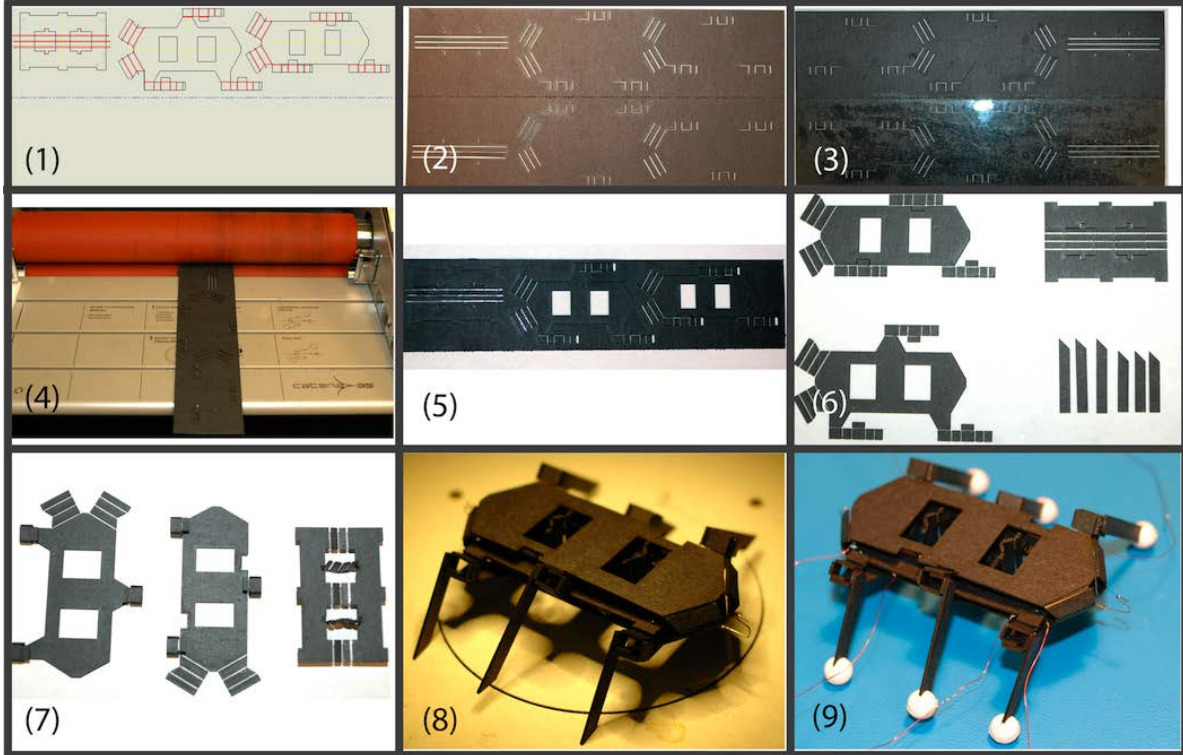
Steps for prototyping a hexapod crawling robot: (1) A 2-dimensional drawing is made in a vector-based illustration program (Solidworks). (2) A blank piece of posterboard with a pre-cut fold line is folded and placed in a laser cutter, and the flexure cuts are made in both layers. (3) The workpiece is removed and adhesive is applied to both sides inside the fold. A 50 μm film of PET is sandwiched between the two sides of the fold. (4) The workpiece is fed through heated rollers at 230°F at a low speed (approx. 5 mm/sec). (5) The workpiece is placed back in the laser cutter and outlines of the parts are cut out. (6) Parts are released from the workpiece. (7) Individual linkages can be folded up in place. The three joints on the two leftmost pieces are fourbars used as hips. The joints in the rightmost piece form two Sarrus linkages when two are folded and glued out of plane. (8) The three plates are joined such that the hips for one tripod sit above the central plate while the hips for the other sit below, and the legs are attached to the hip fourbars. (9) SMA actuators are attached and wired in place and spherical PDMS feet are added.
